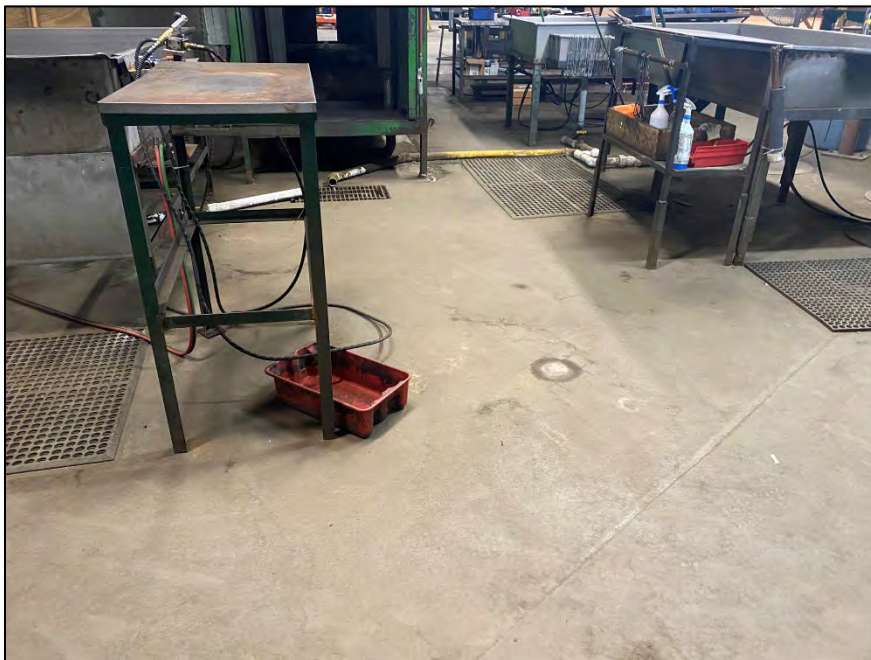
Central location in shop where hydrostatic test water is discharged via a floor drain to the City of Jacksonville Sewer. A patch in concrete is also present that may indicate a soil boring location.
